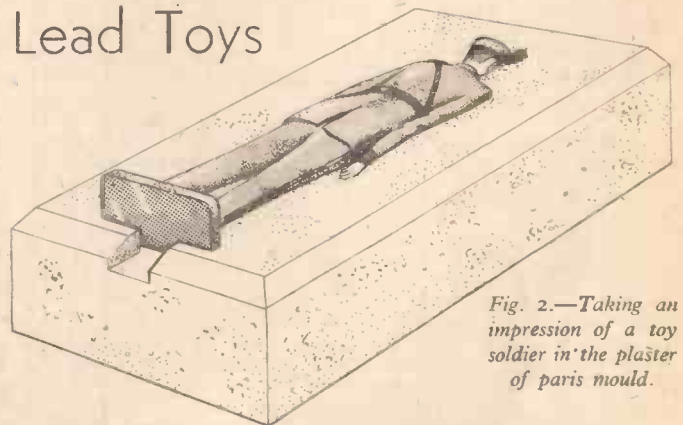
Taking an impression of a toy soldier in the plaster of paris mould.
